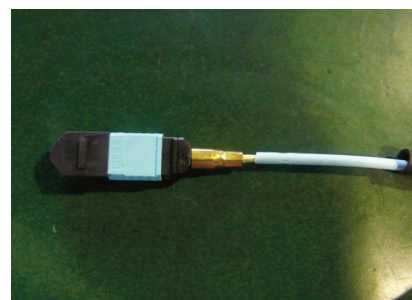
Failed Cable Flex Test for Manufacturer A1 and A4 MPO/MTP Trunk Assemblies
